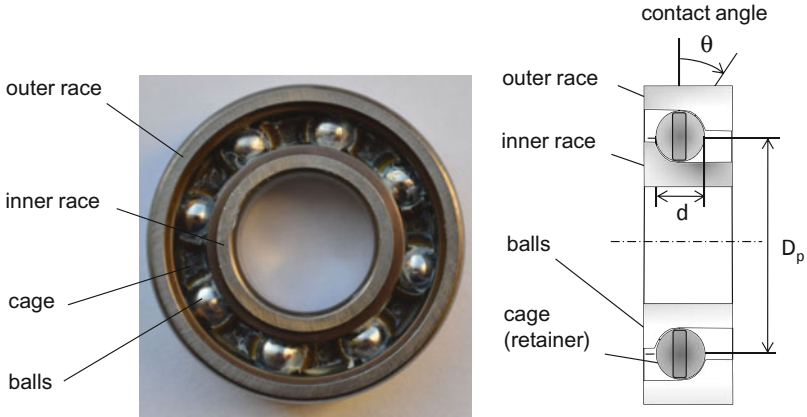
Key elements of an angular contact ball bearing [4]
